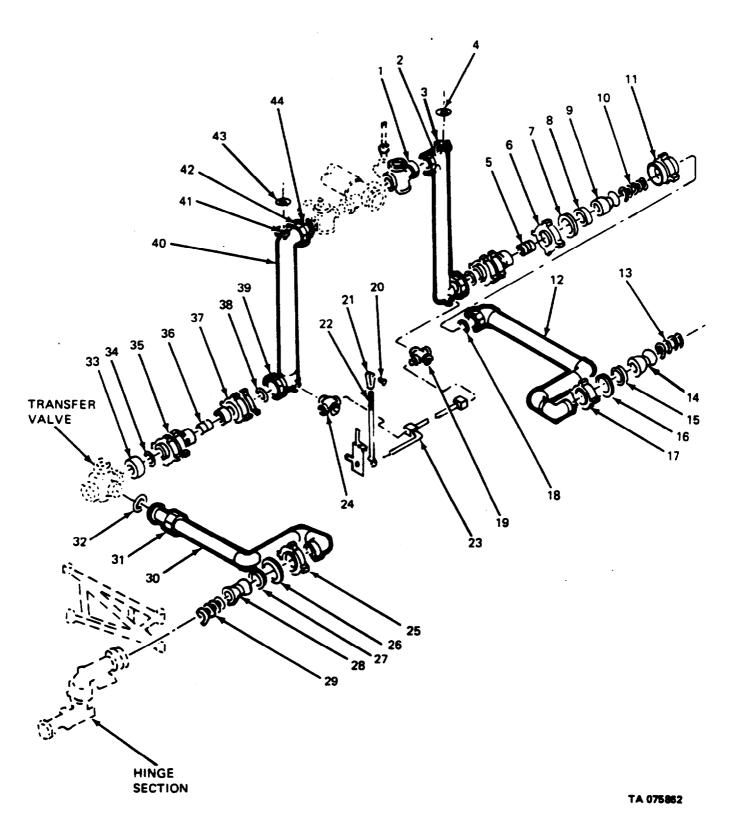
Remove/Install Spray Bar Distributing Lines and Component Parts (Sheet 1 of 2).
